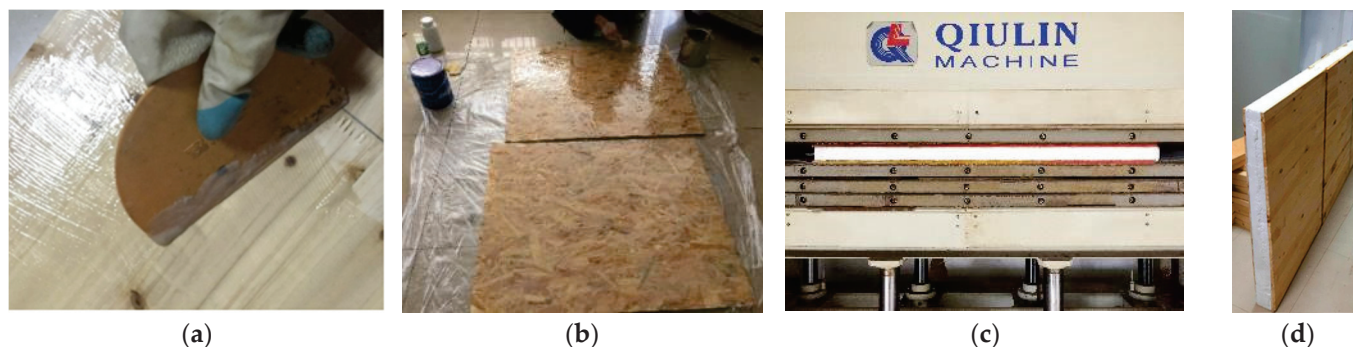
Production process for sandwich wall panels. (a) Even spreading of adhesive layer. (b) Surface of panel with adhesive layer applied. (c) Cold pressing. (d) Specimens.
